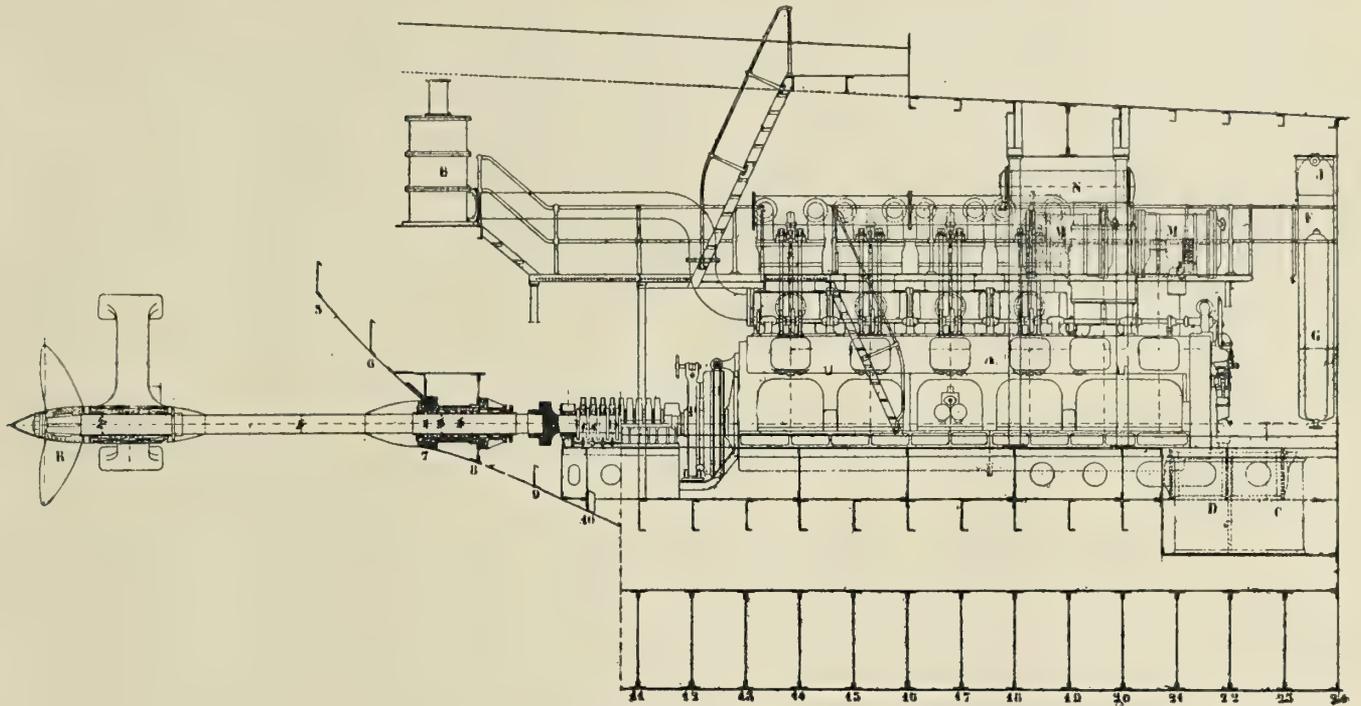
LONGITUDINAL SECTION THROUGH ENGINE ROOM
